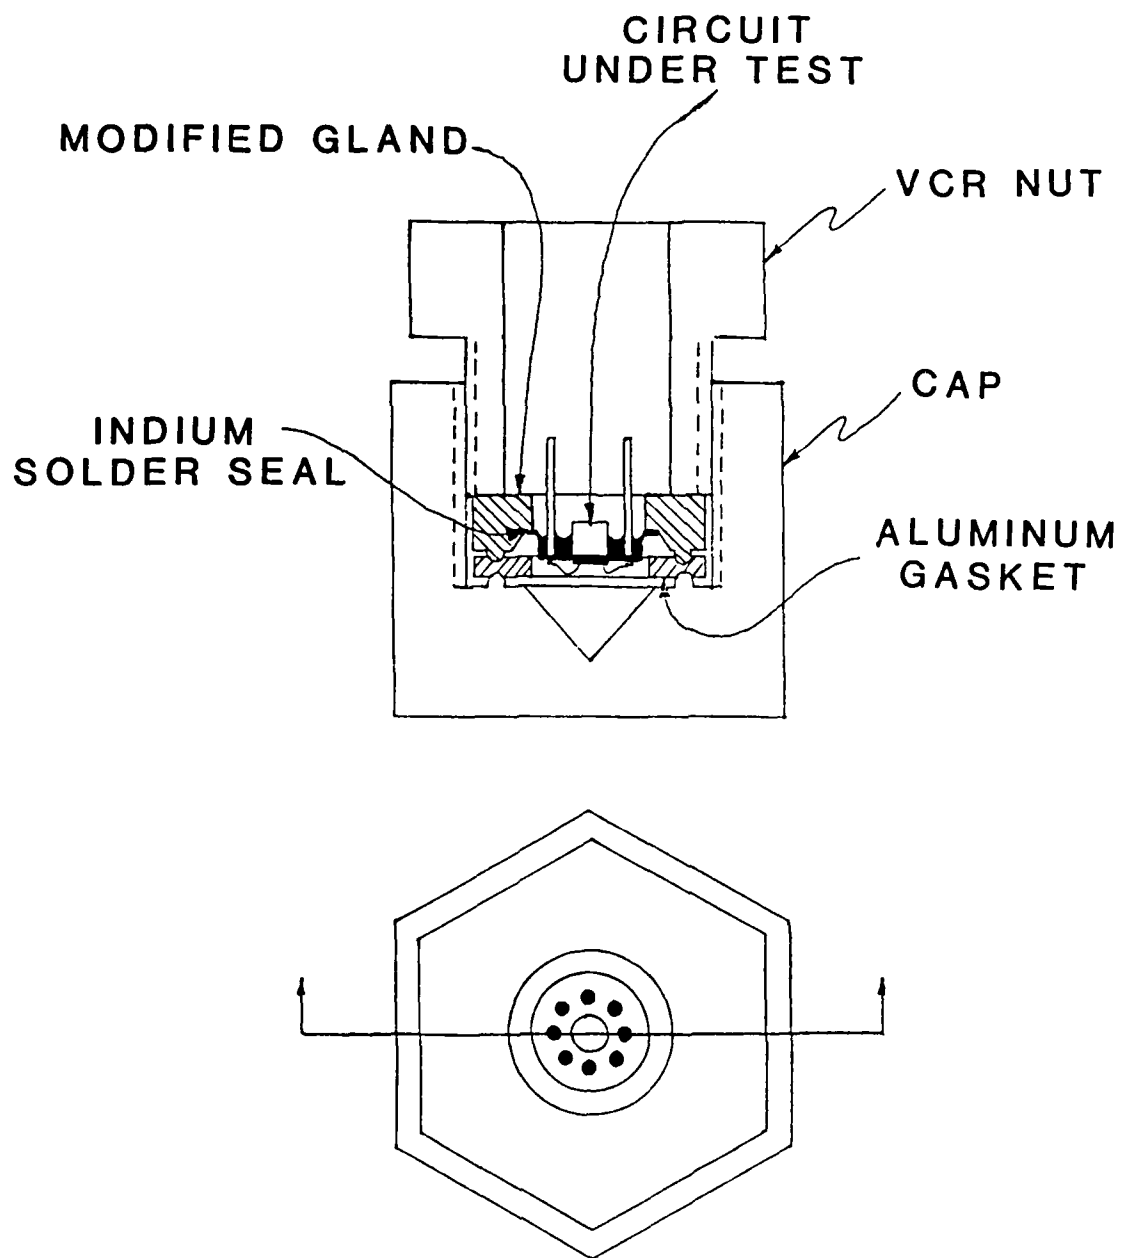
Test Fixture For Moisture Failure Threshold Testing.
